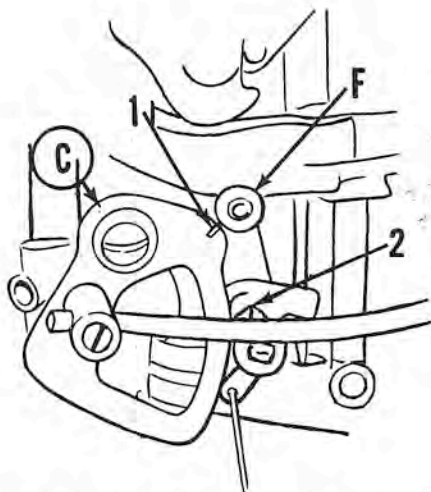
To synchronize the throttle on later models, move the cam (C) until scribe line (1) is aligned with cam follower (F), then loosen clamp screw (2) and position follower arm on throttle shaft until follower (F) contacts cam (C) and throttle valve just starts to open.
